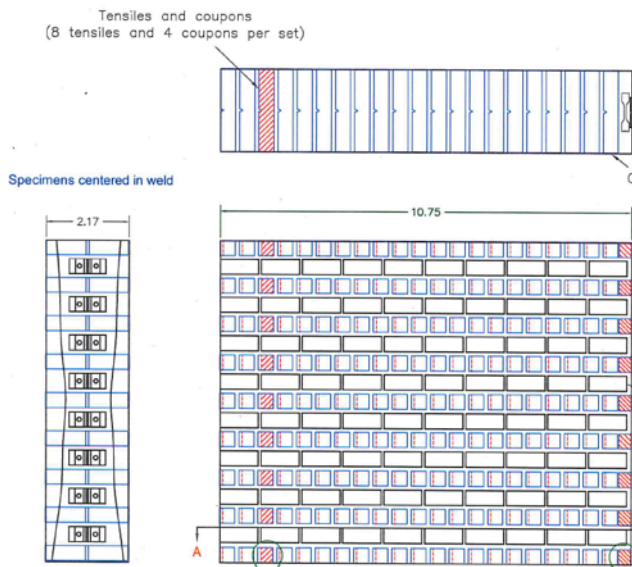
Detailed CF block layout of alternating rows of 0.4T C(T) and Charpy specimen positioned over the WF-70 beltline. Hatched blocks were machined into SS3 tensile specimens and chemical and microstructural coupons.
